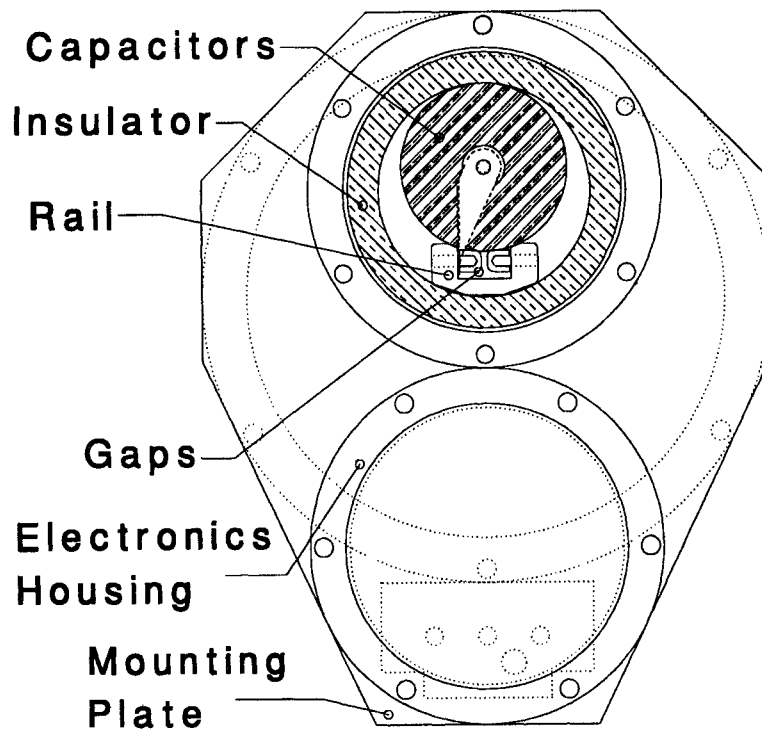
End view of a radial flash x-ray unit showing the Marx and mounting plate details.
